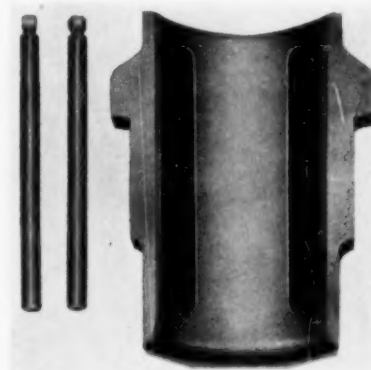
SATCO-LINED "TWINPLEX" ALARM JOURNAL BEARING
